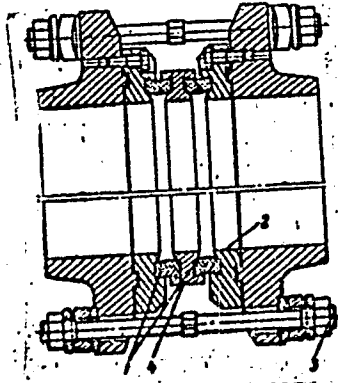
1 - elastic rubber elements; 2 - flange; 3 - coupling; 4 - floating ring.
